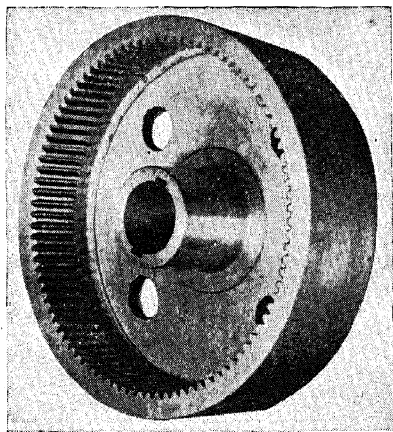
Internal gear. (Courtesy Lukenweld, Inc.)
